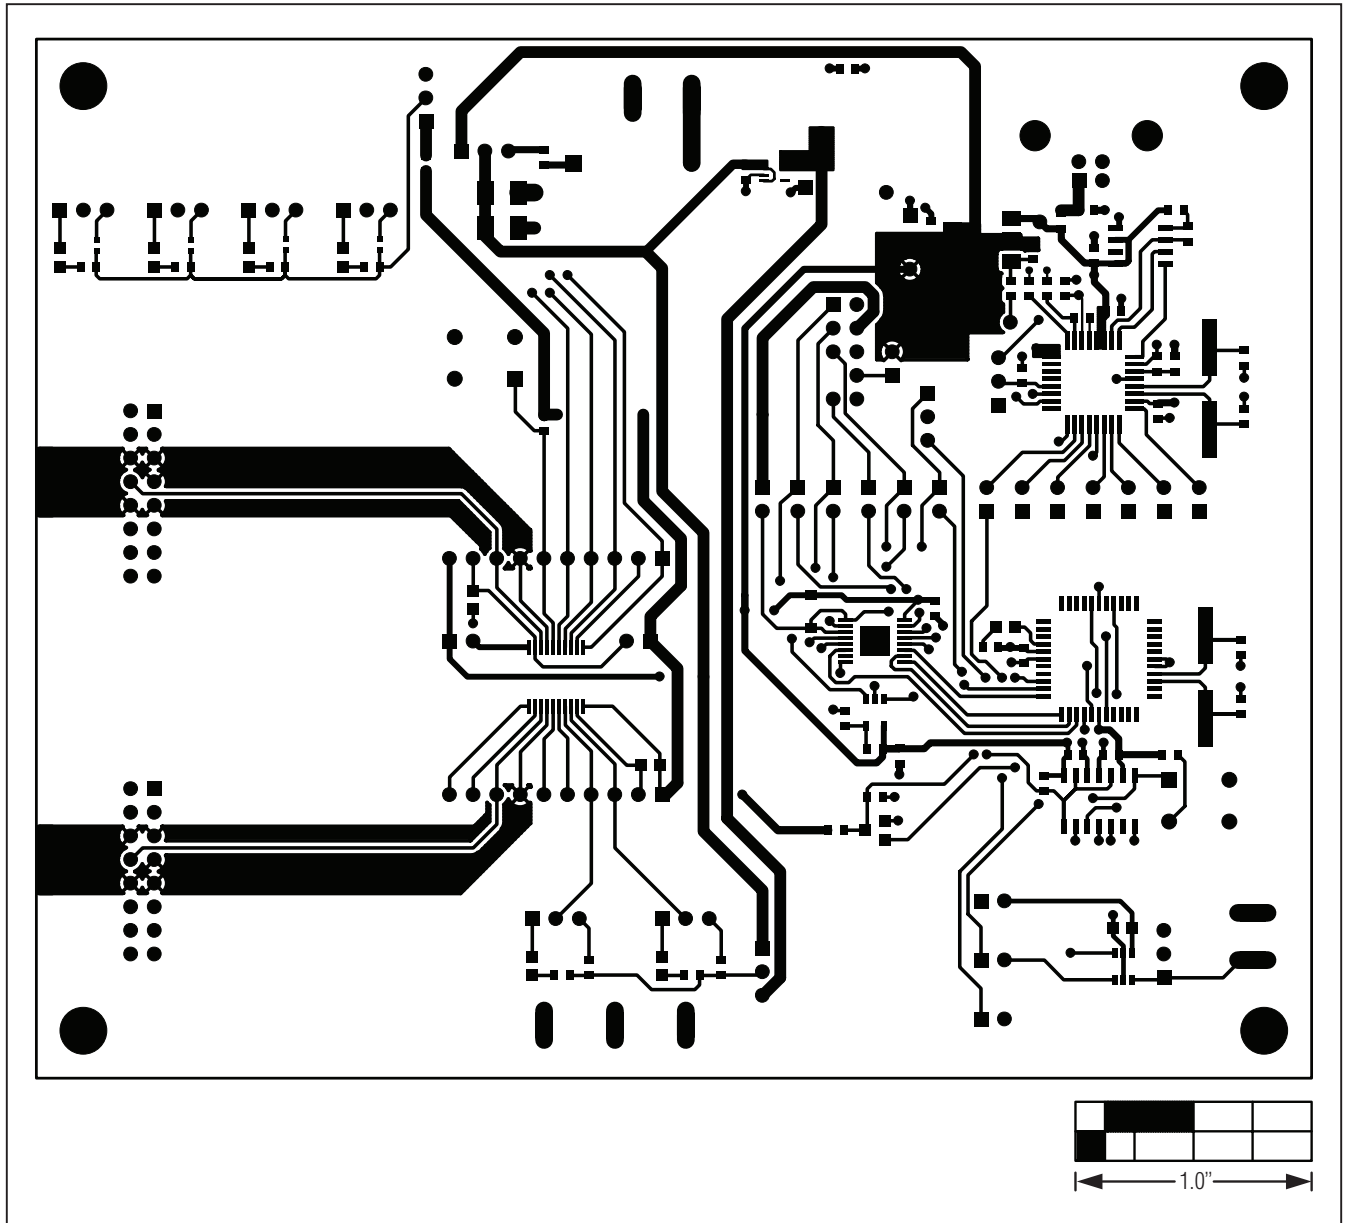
MAX1441 EV Kit PCB Layout—Component Side
